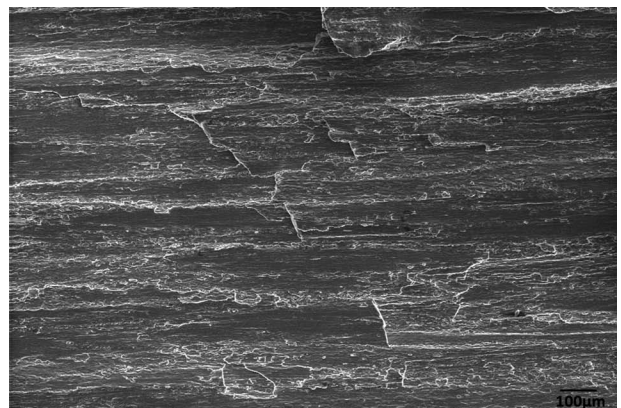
Another location of fracture surface of cracks AFNOR 7020 propellant tank
